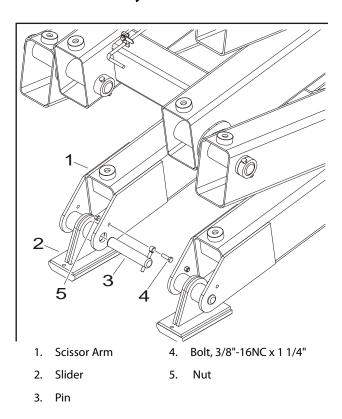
Scissor Assembly Removal - Chassis Connection
